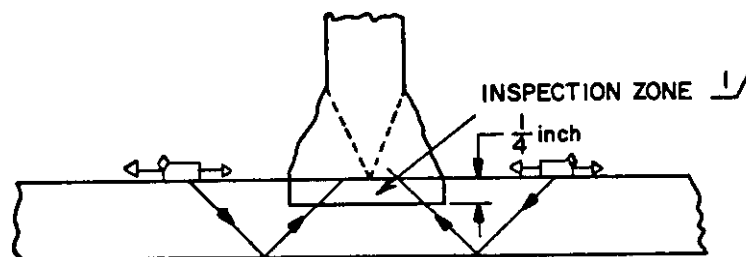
Typical viewing screen calibration (tee welds)
